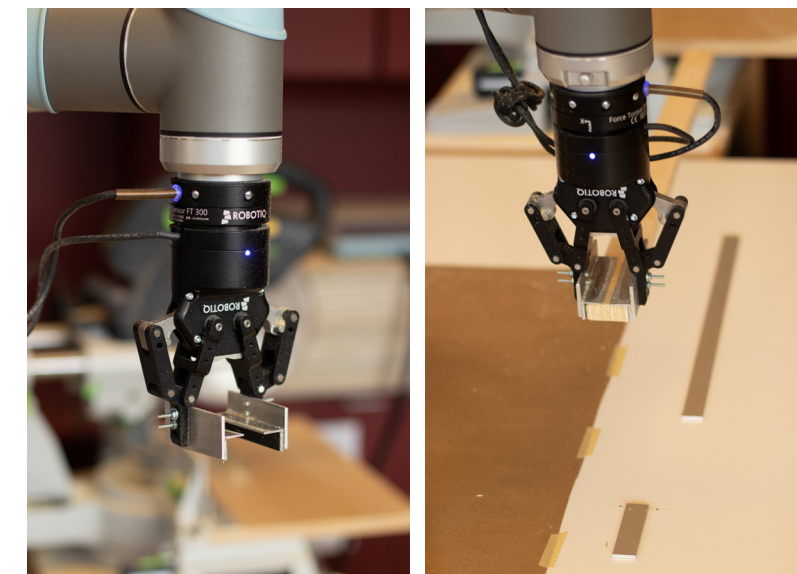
The custom tool that is added to the gripper to support the grasped component and prevent tilting.
